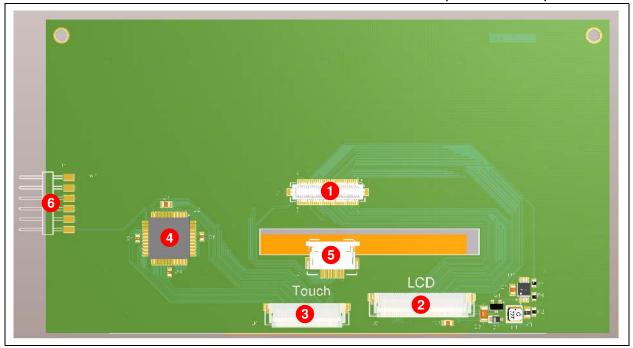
WQVGA PCAP TOUCH DISPLAY BOARD LAYOUT (TOP VIEW)
